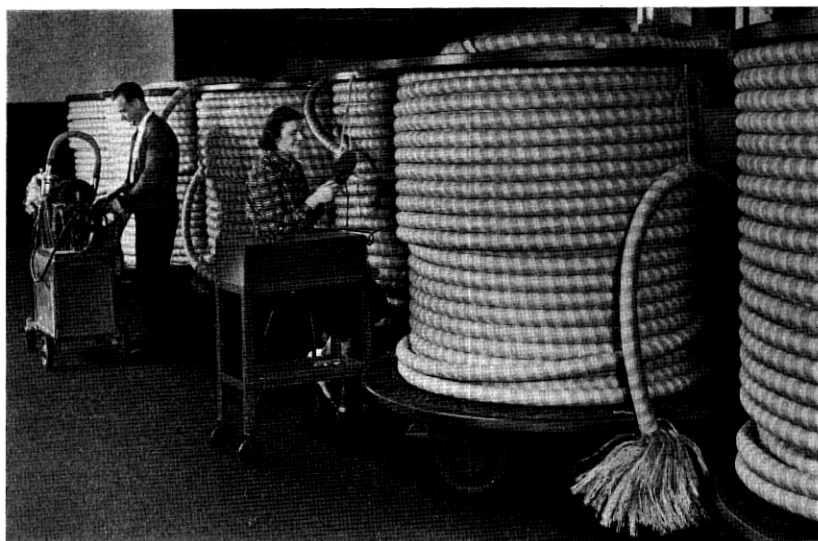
Removal of paper from cable end and testing of circuits preparatory to drying.
